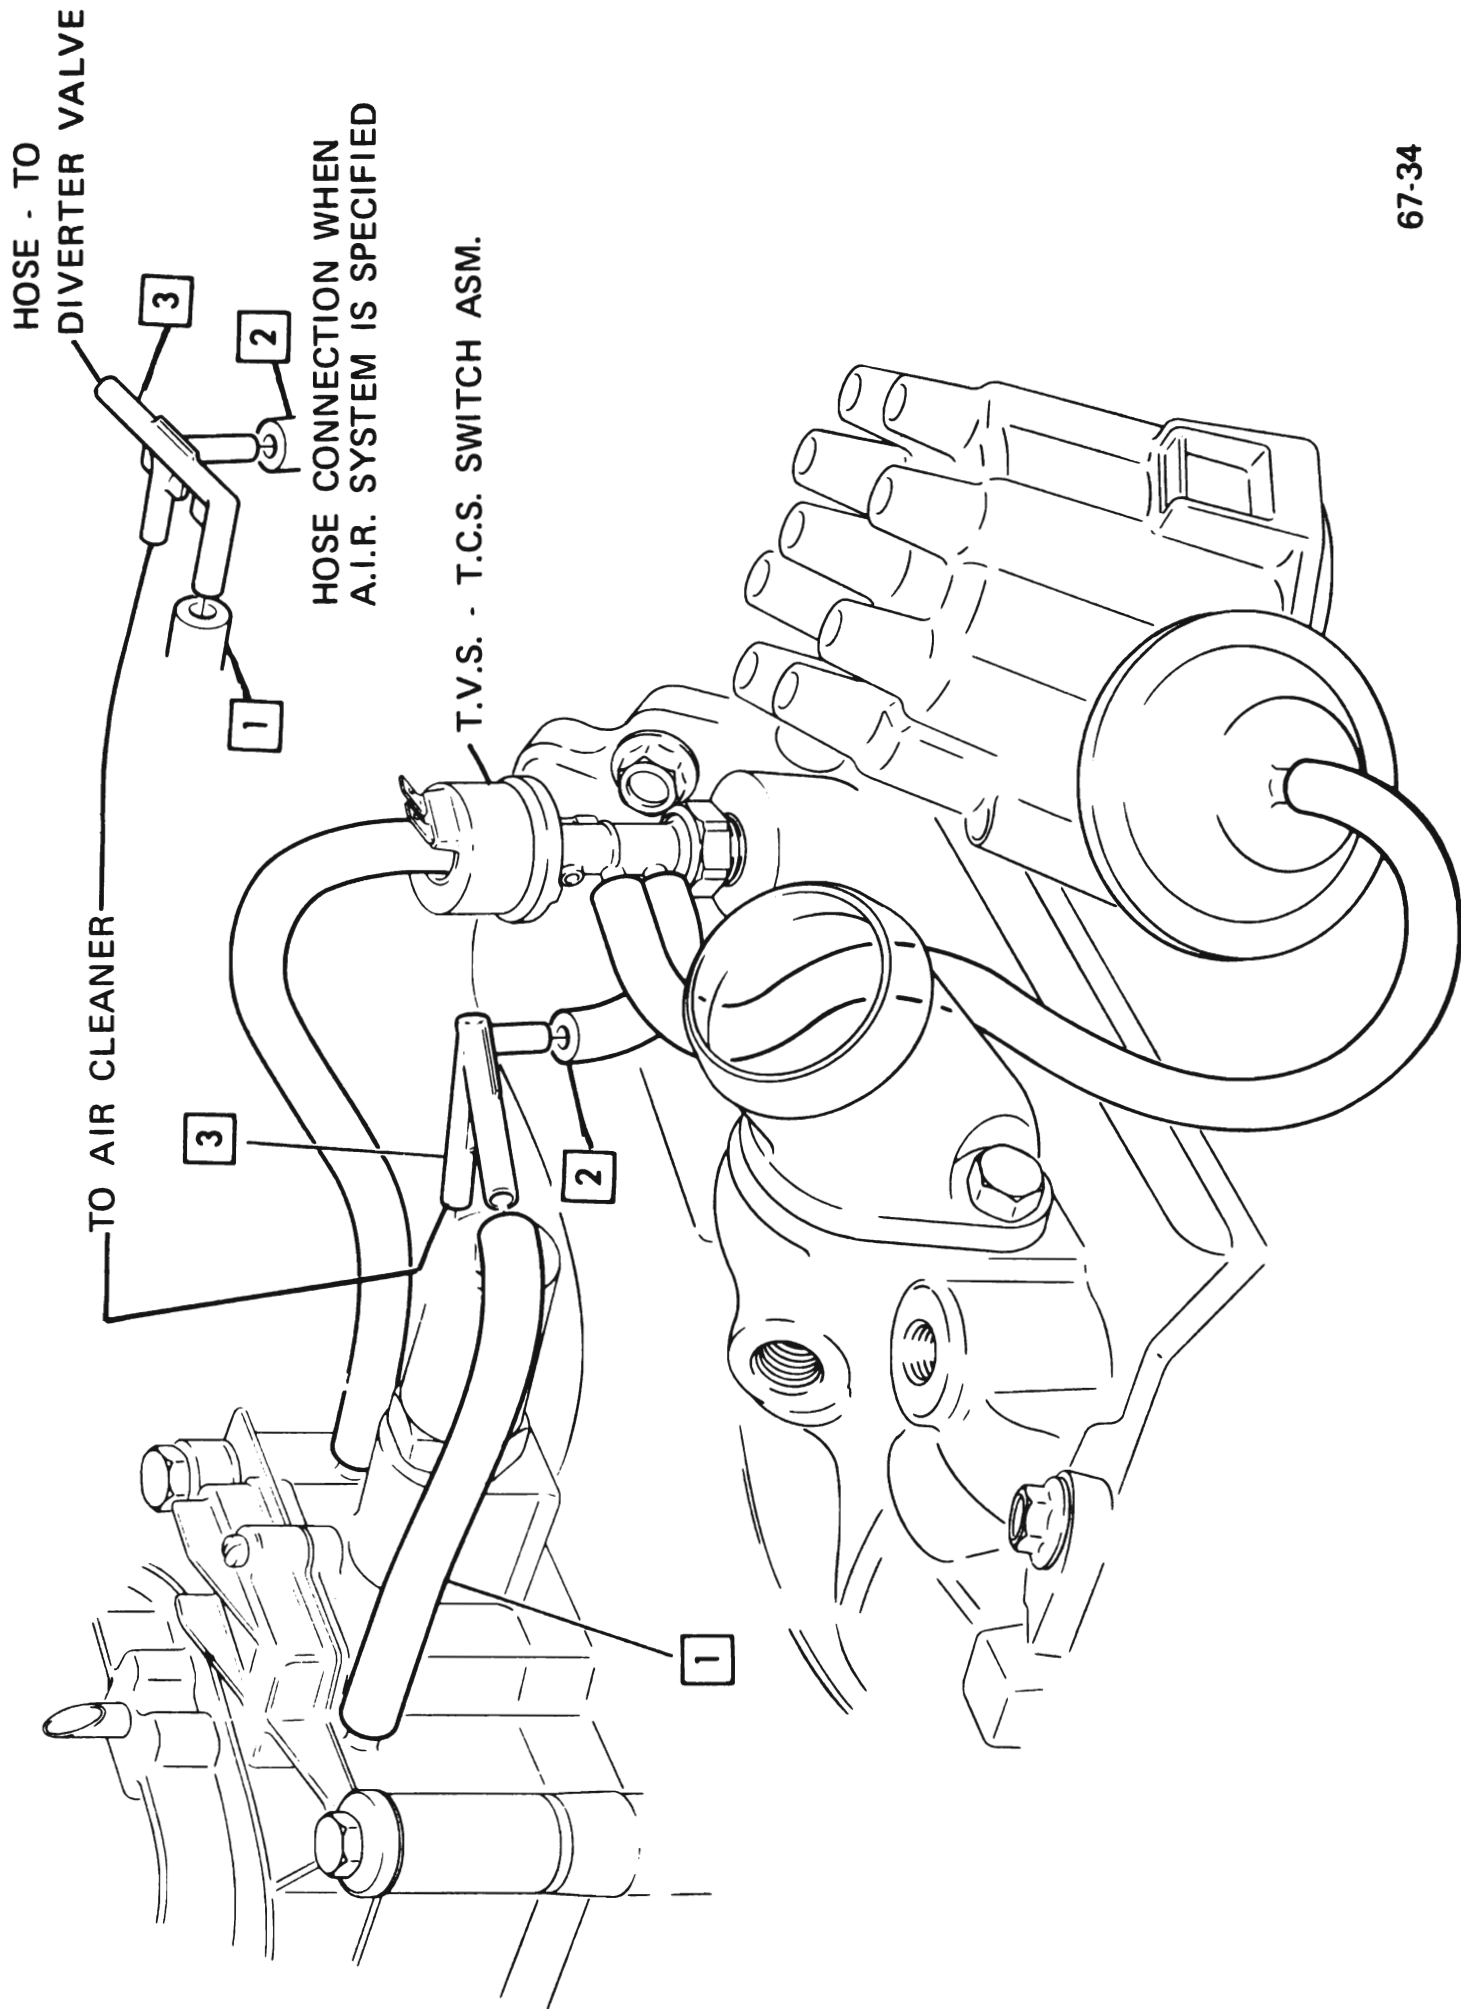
Vacuum Tube Routing - 350 4-BBL - 4D-4F-4G-4H-4L-4N Series With A/C
